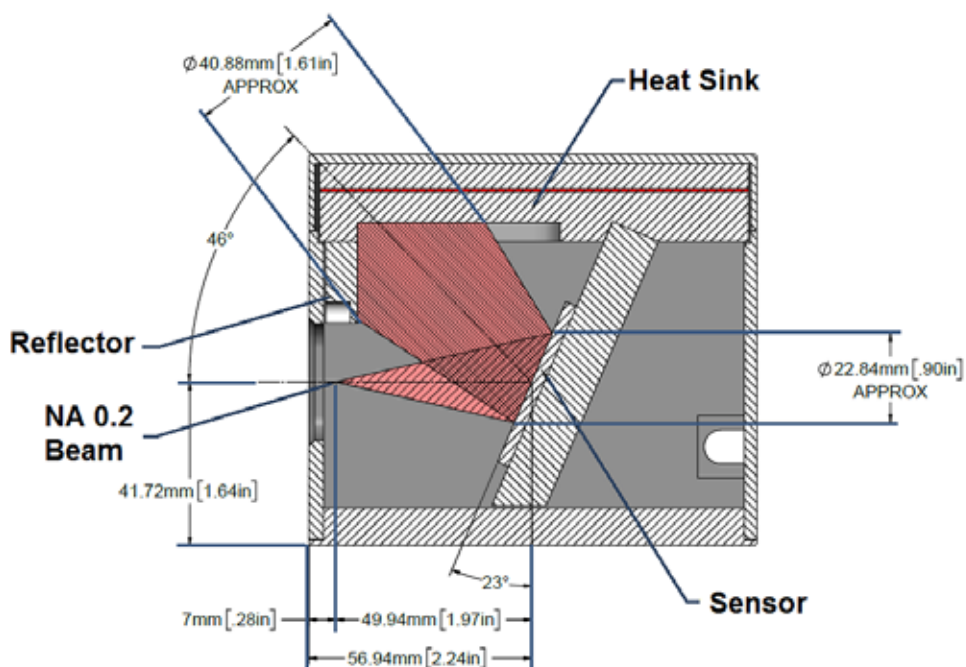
Cross-Section of Beam Hitting Sensor Using a QBH Adapter
